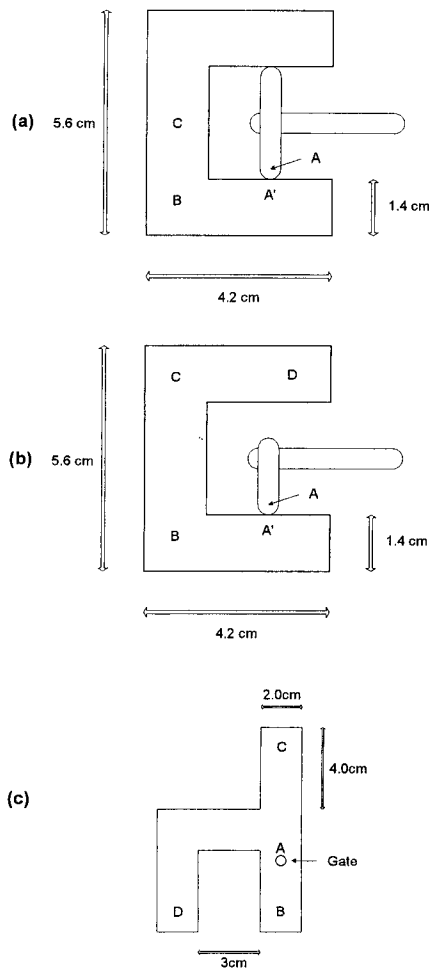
Molds used for numerical analysis ; (a) mold A, (b) mold B, (c) mold C.
